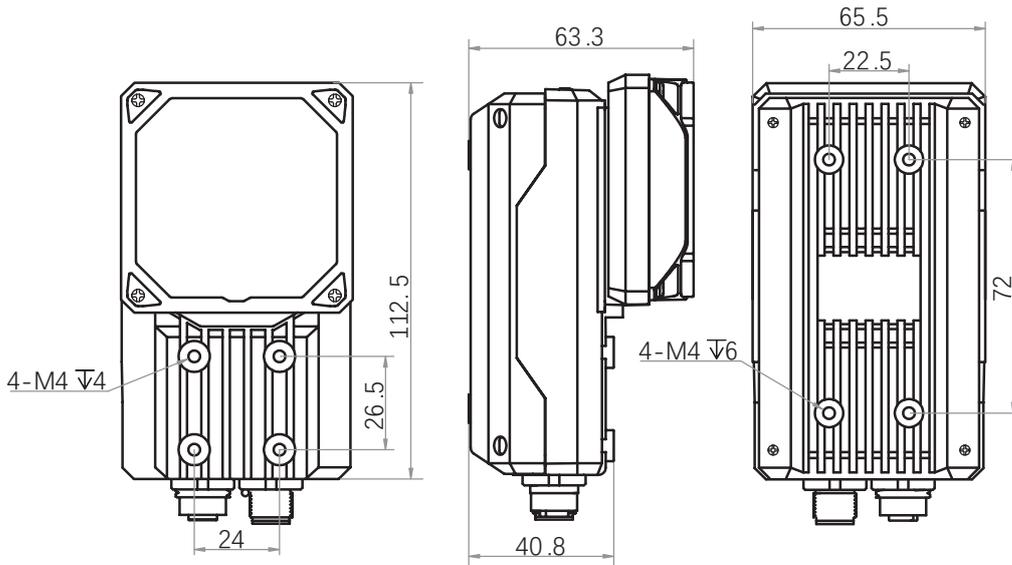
Mechanical Dimensions (in mm) of the code reader with 65.5 \* 112.5 \* 63.3 mm housing (Built-in 6 LED lamps and a mechanical focus lens.).
